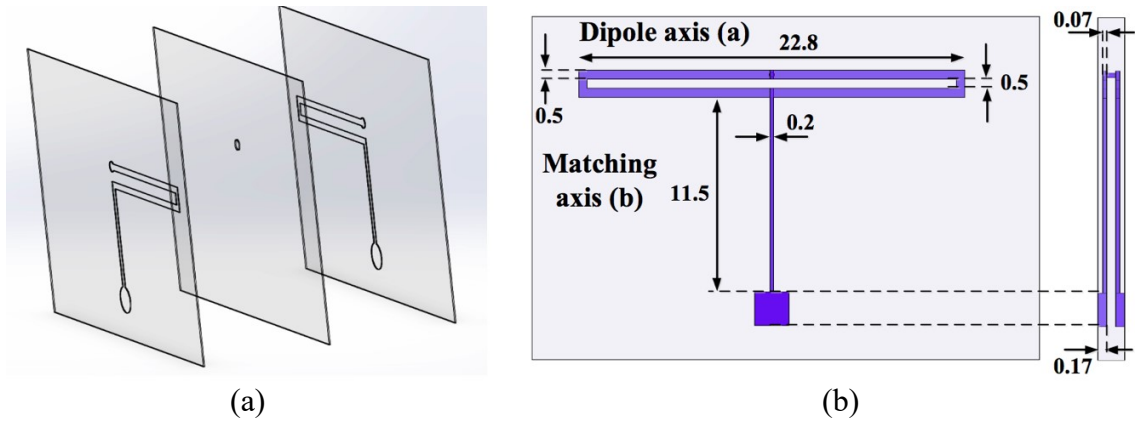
(a) Exploded view of the flexible multilayer dipole fabricated with a single injection step and (b) its dimensions.
